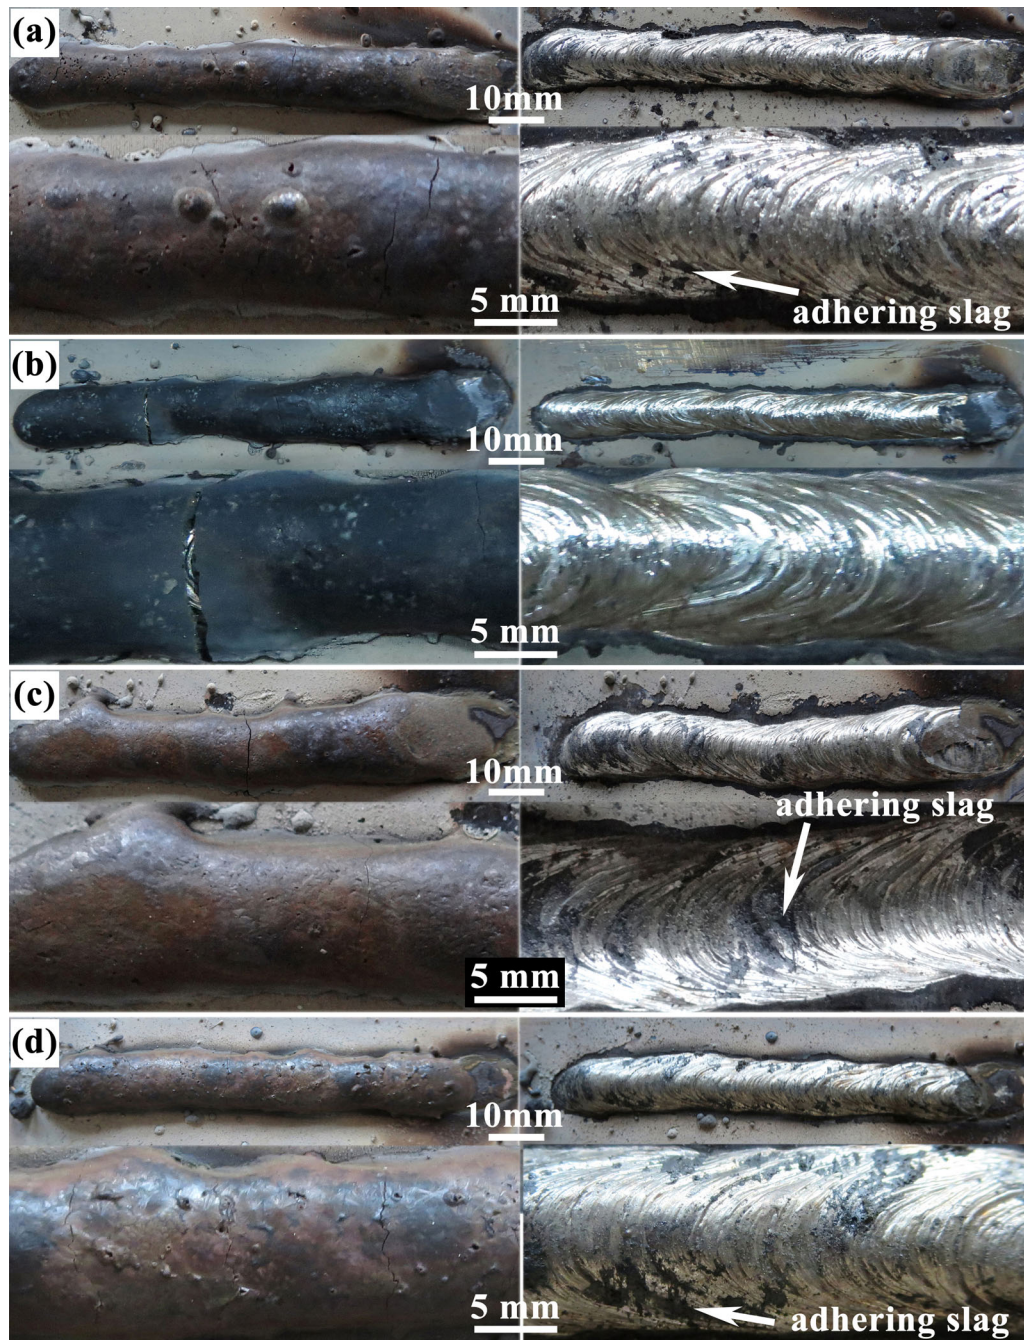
Weld images of the ENiCrFe-7-covered electrodes with B-group flux coatings. (a) B2, (b) B3, (c) B4, and (d) B5. The left: the welds covered by slugs; the right: the welds after removal of the slugs.
